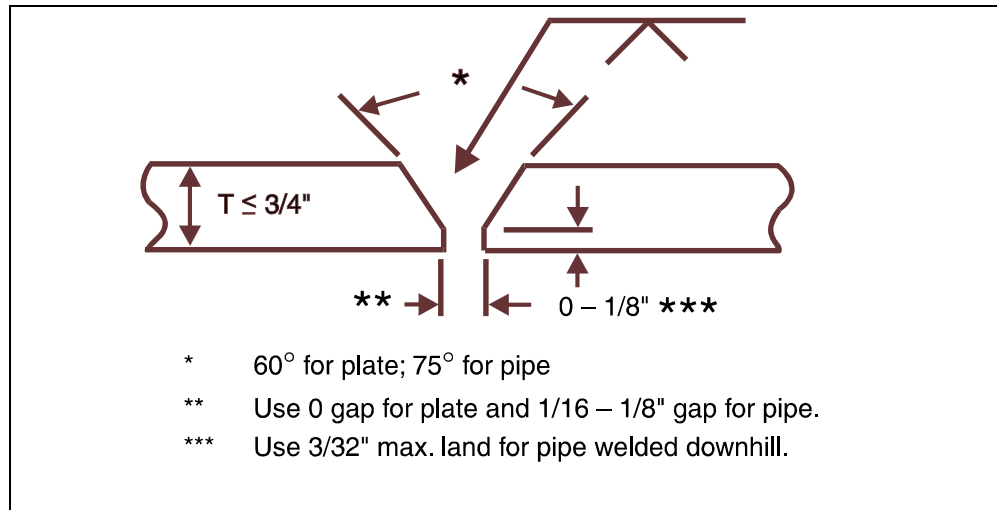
Single Vee Joint (Courtesy of the American Welding Society)
